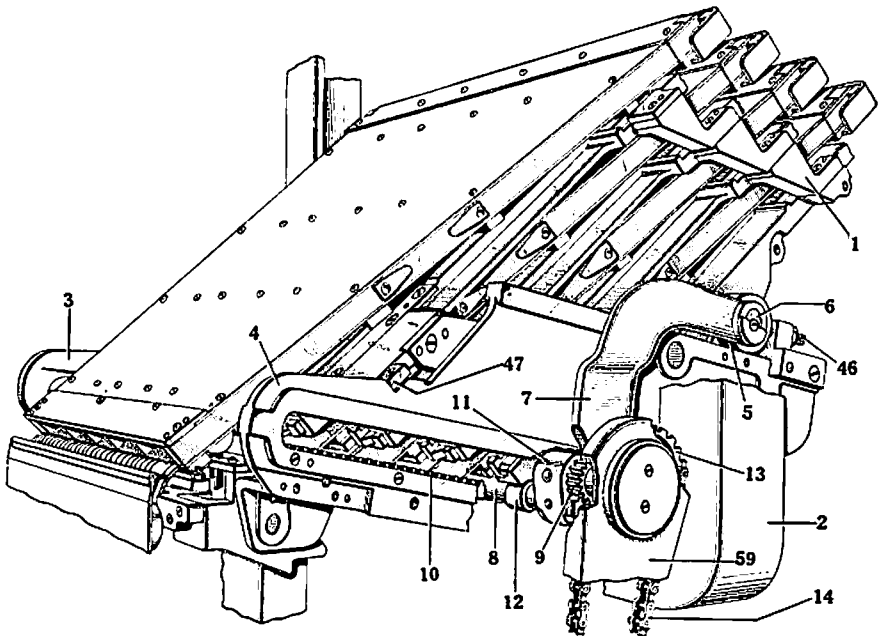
Magazine Frame, Supporting Brackets and Shafts in Assembly. This view shows how the assembled frame is supported on the left and right-hand brackets 3 and 4 and also indicates the connection between the lower shaft 8 and the upper shaft 6 through links 7. The lower shaft 8 promotes the forward and backward movements of the frame when operated by the mechanism shown in Fig. 195.
